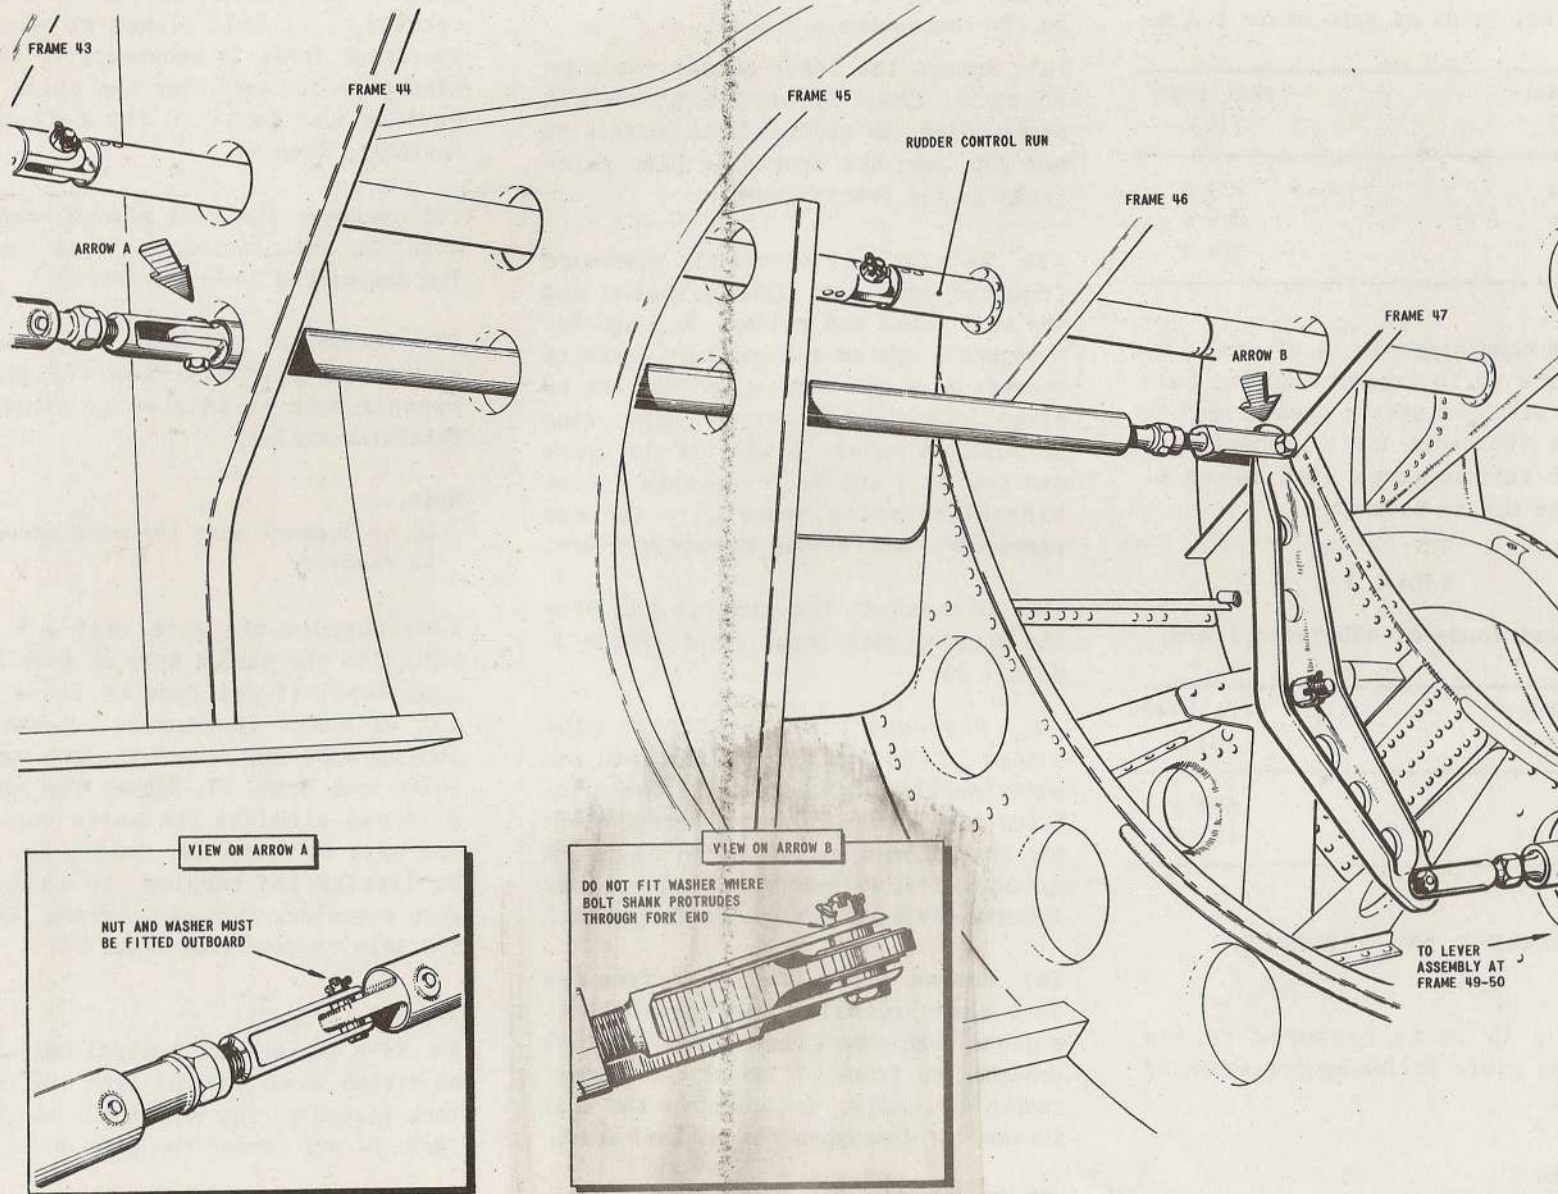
LEVER-ROD ASSEMBLY - FRAMES 43-47
